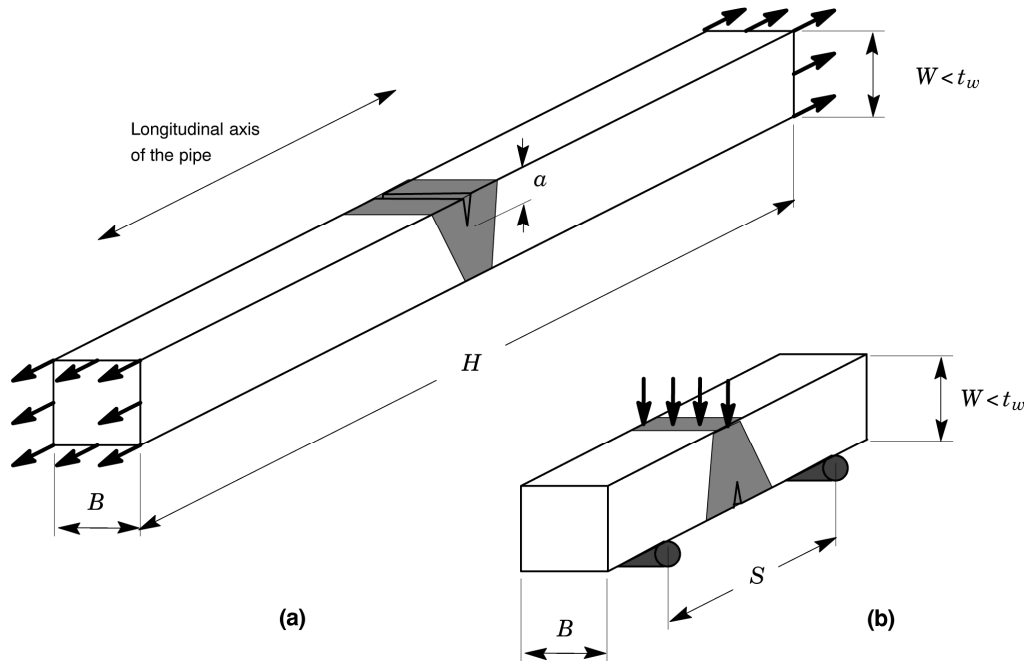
Geometry of tested fracture specimens with weld centerline notch. (a) Clamped SE(T) specimen with $a/W = 0.4$ and $H/W = 10$; (b) 3P SE(B) specimen with $a/W = 0.25$ and $S/W = 4$. All geometries follow $(B \times B)$ configuration
